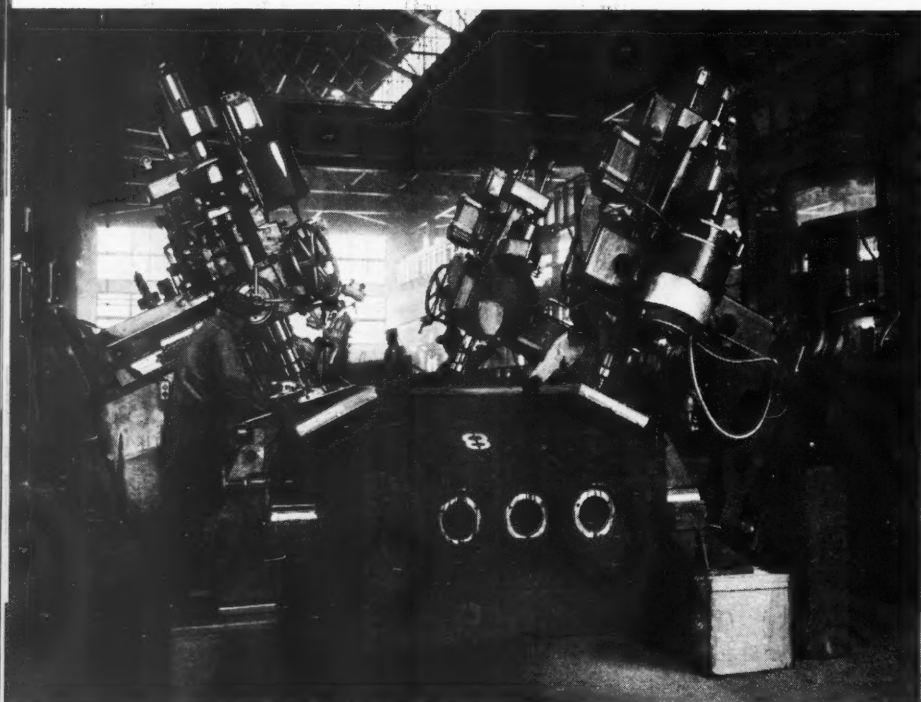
This Sellers way type multiple-spindle drilling machine drills suspension-bracket fastening holes in both sides of the slope plates
